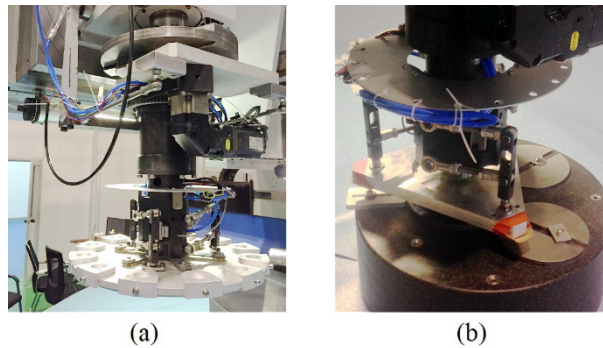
Compound motion unit equipped with different sizes of tool bases. a) Normal status, equipped with a round base for $\varnothing 400\text{mm}$ tool. b) Test status, equipped with a triangle base for $\varnothing 90\text{mm}$ tool (still round tool-shape).
